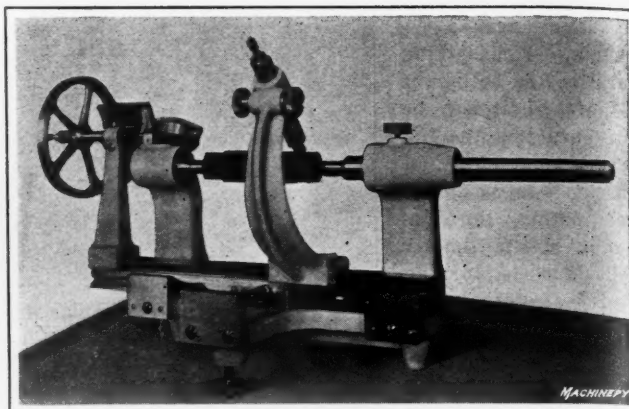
Opposite Side of Lea Thread Lead Testing Machine
